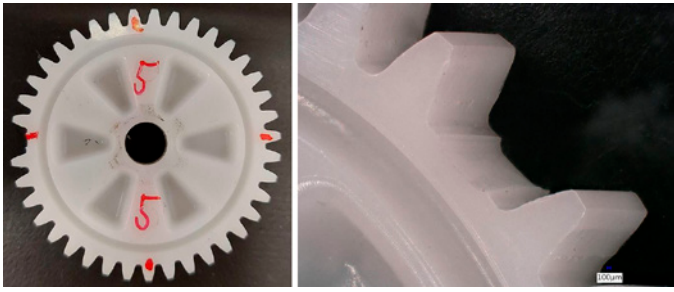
The root fatigue failure. The test should be stopped when the first tooth is fractured.
